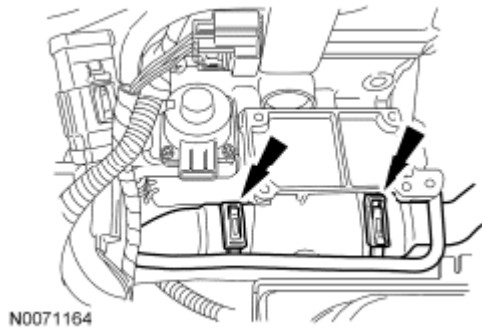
Locating Upper Radiator Hose And Heater Hose From Coolant Bypass
